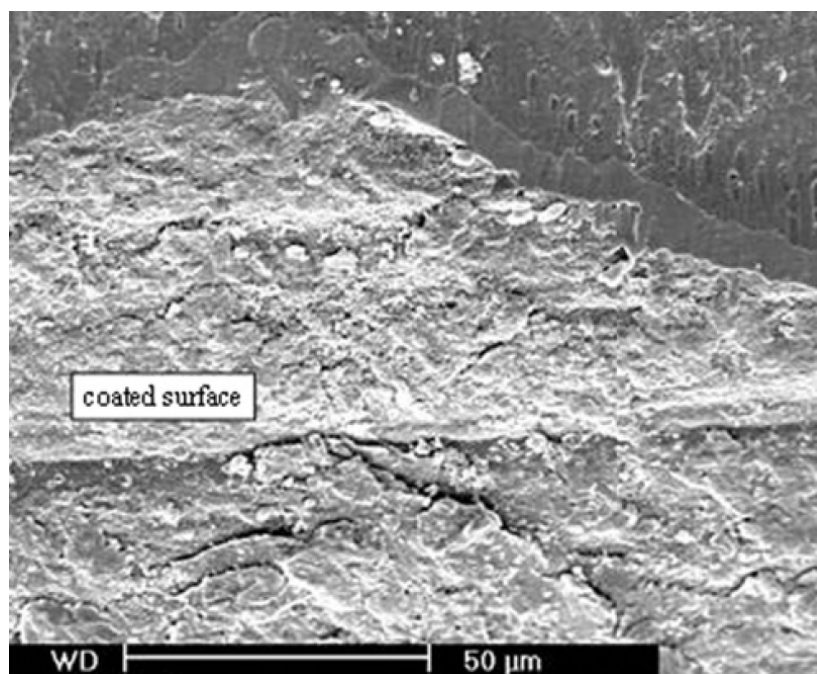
Cracks in the coating layer at the leading cutting edge after machining at speed 100 m/min, feed 0.15m/min (Abdel-Aal et al., 2009).
